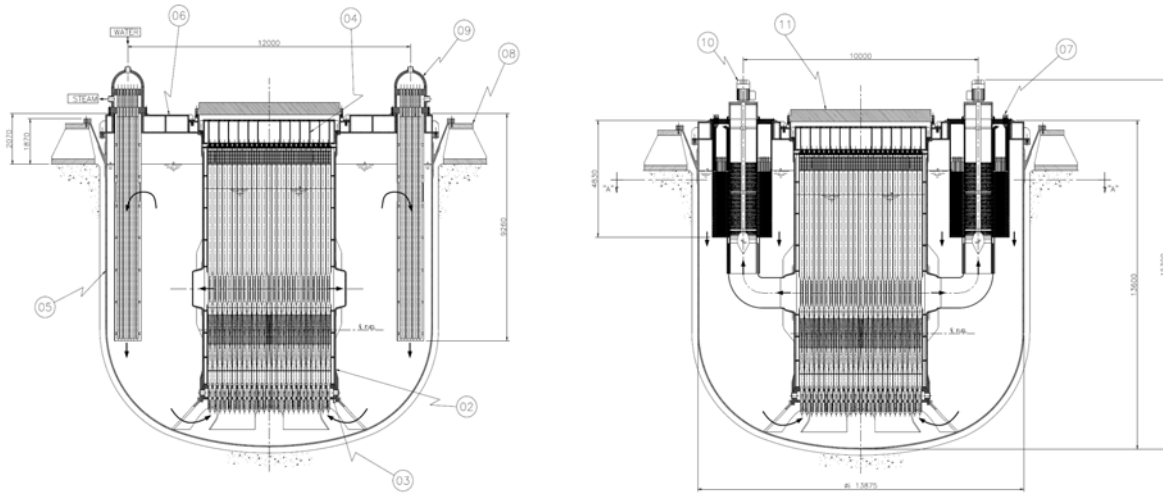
Reactor block vertical sections: 01) Fuel assembly ;02) Inner vessel; 03) Core lower grid; 04) Core upper grid; 05) Reactor vessel ; 06) Reactor cover; 07) Steam Generator; 08) Vessel support; 09) DHR dip cooler; 10) Primary pump; 11) Reactor FAs cover)
